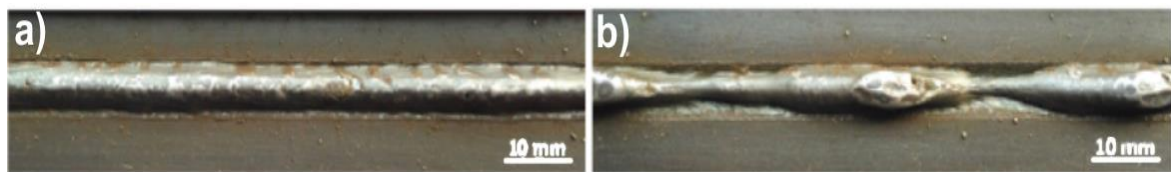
Weld back a) Without humping bead at weld speed-1.77 m/min, b) With humping bead at weld speed-2.01 m/min. Reproduced with permission from Ref. [45].
